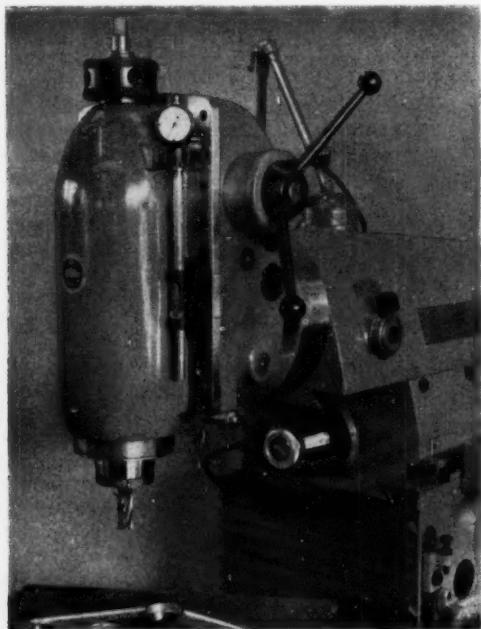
The New Boring and Milling Head for the Thiel 158 Toolroom Milling Machine
